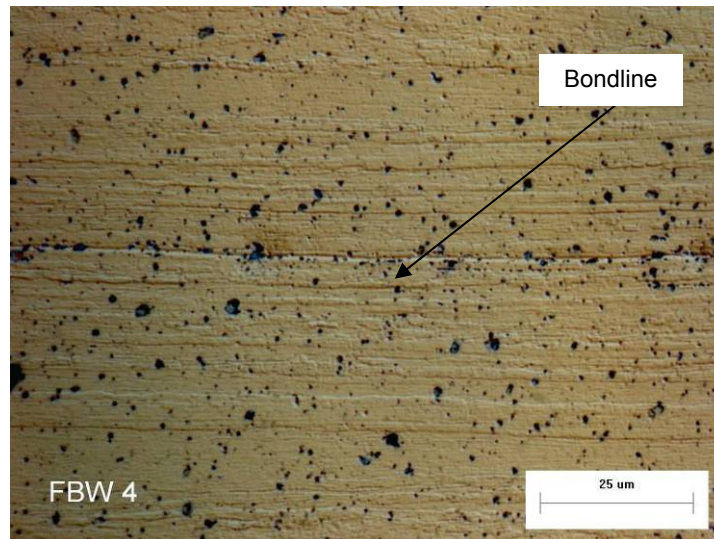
Initial Success with Flash Butt Welding Process
